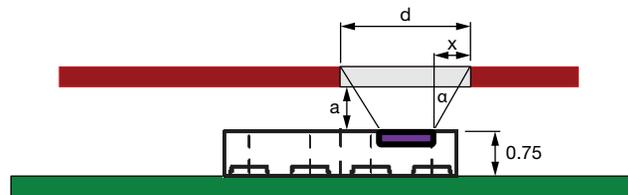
Window Dimensions for One Hole (in millimeters)
